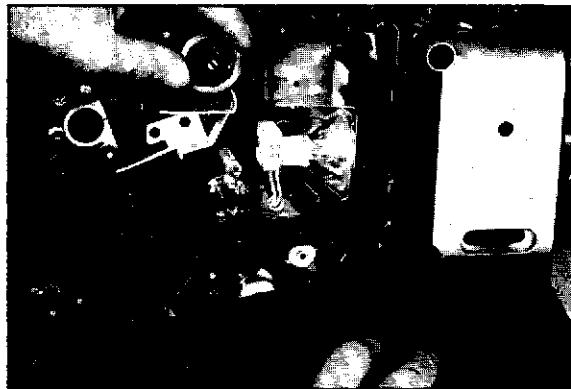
WINDING TAKE-UP SPROCKET SPRING
